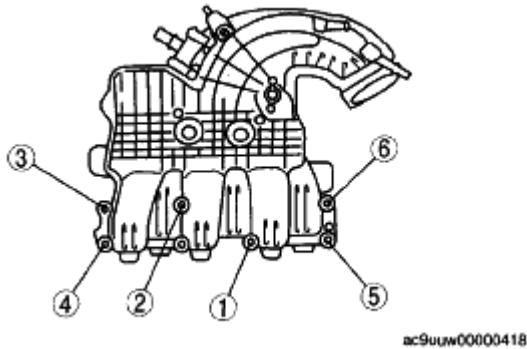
Identifying Intake Manifold Bolts Tighten Sequence
